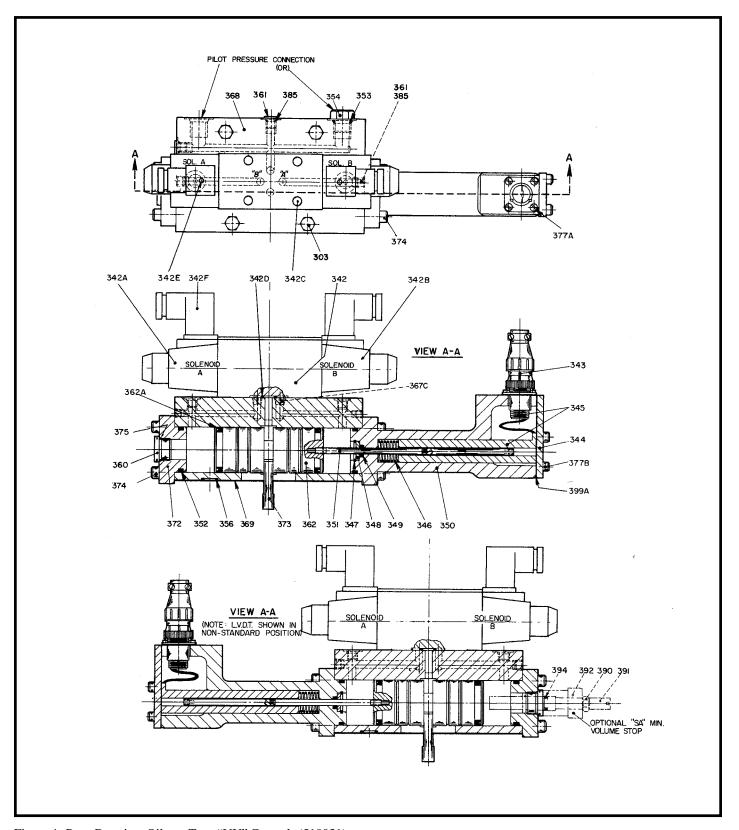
Parts Drawing, Oilgear Type "VU" Controls (510031).
